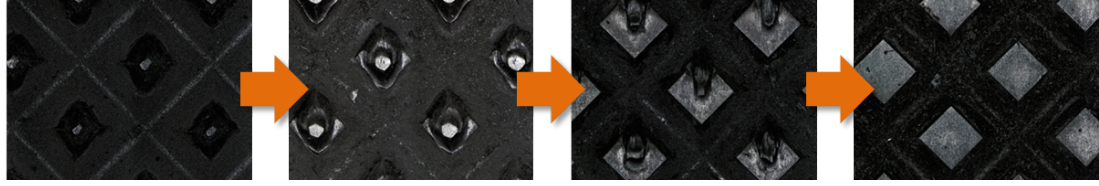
Tooling degradation process in ultrasonic metal welding
